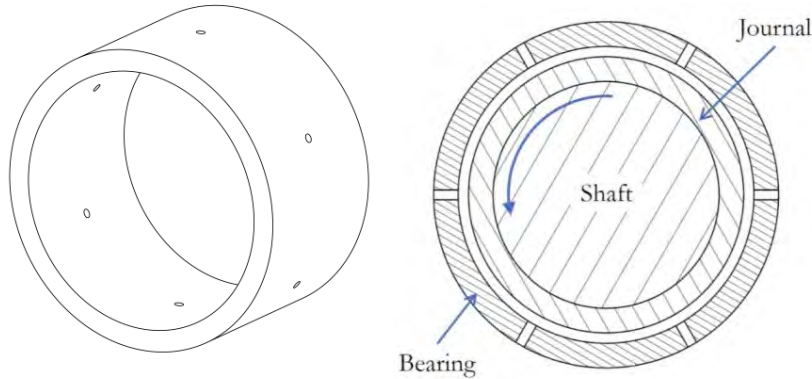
Schematic view of the orifice-compensated journal bearing.
